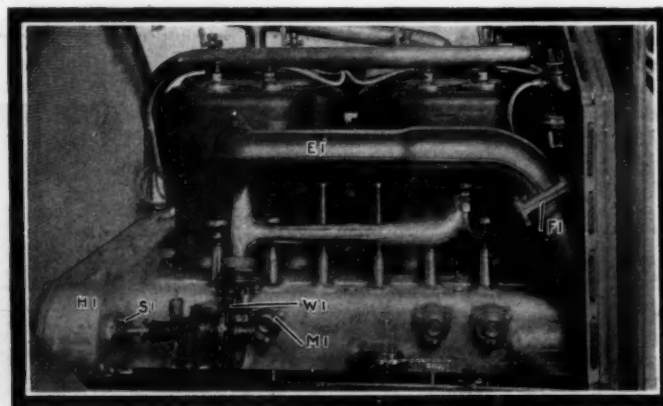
Left hand side of the motor, showing the centrifugal water pump and a spring safety dog adapted to drive the same. The pressure relief valve is also shown
